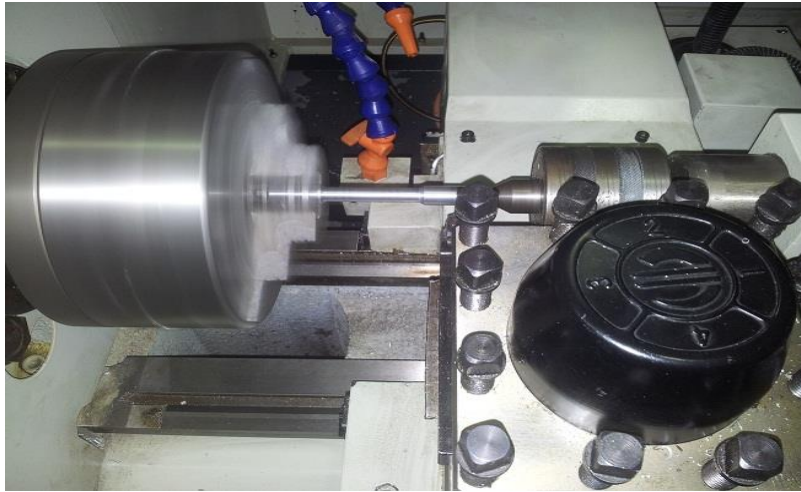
Tensile specimen during manufacture in CNC machine
